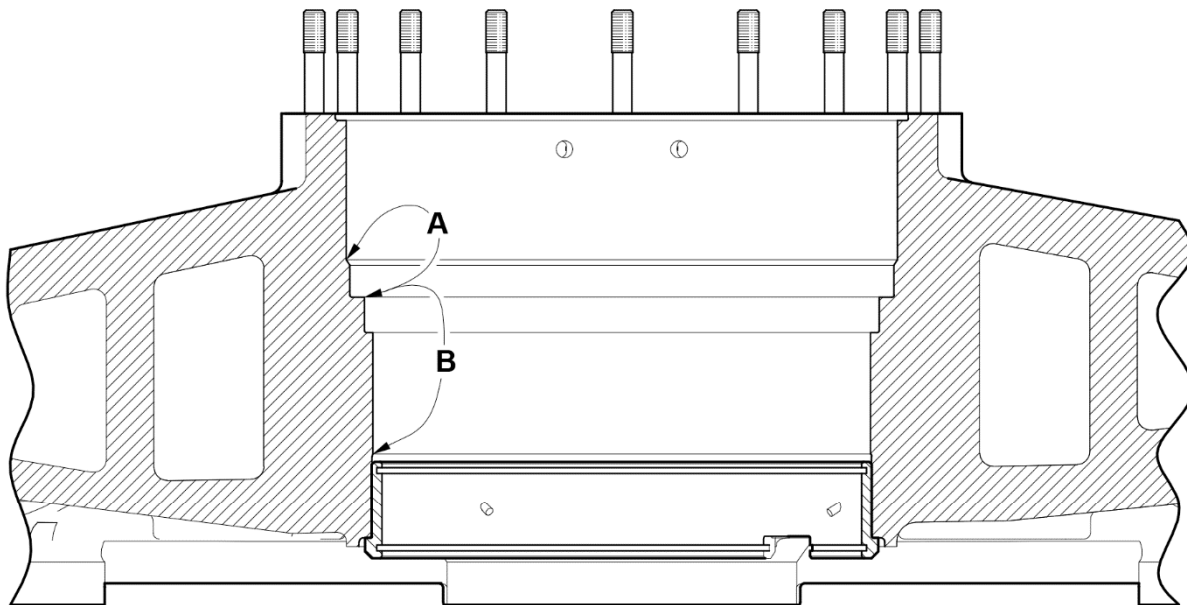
Borescope Inspection Of The Debris Pan Assembly
